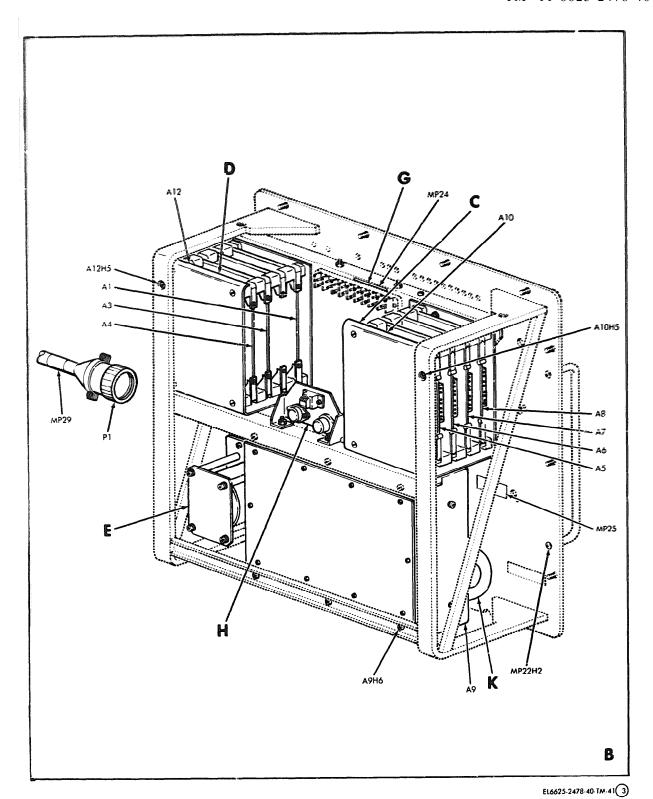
(3). Test set panel assembly 1A3, location of parts (sheet 3 of 7).
